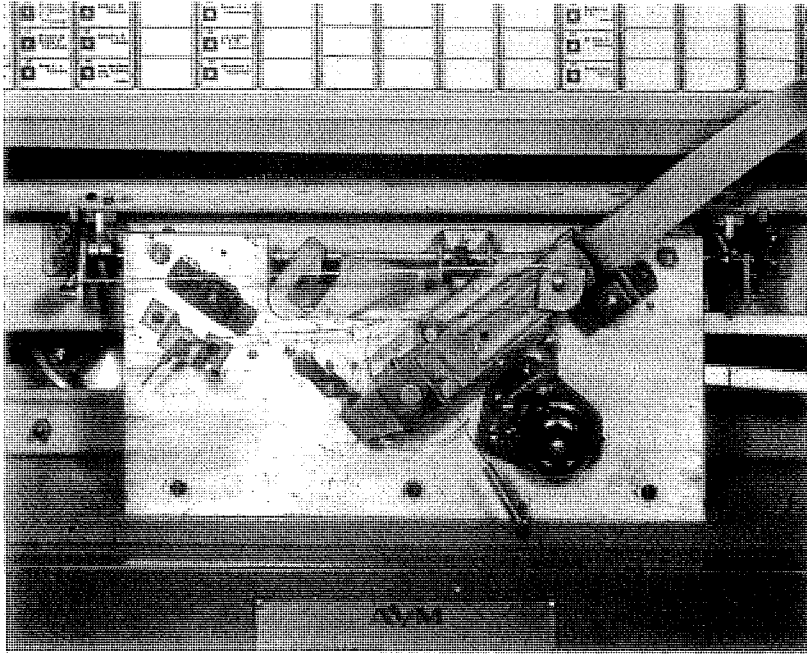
Shows main lever at the extreme right in "Voting" position.
